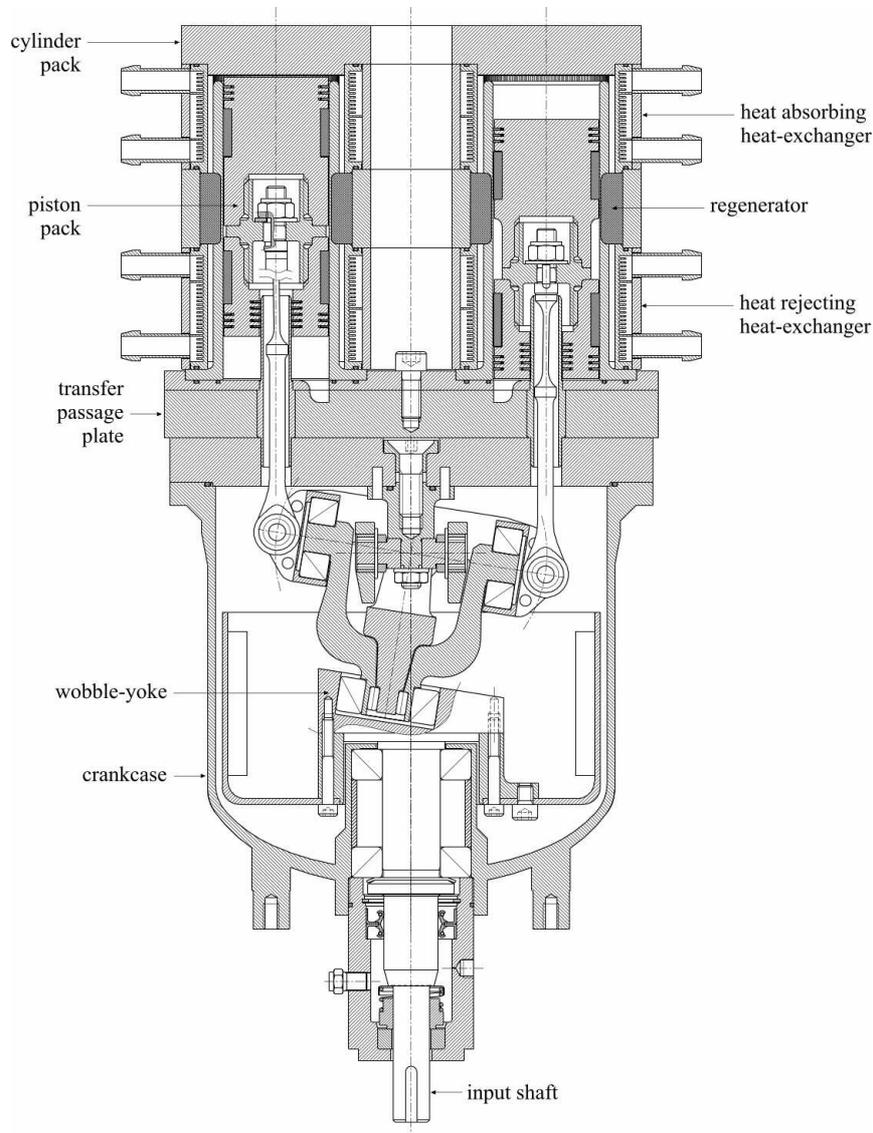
Cross-sectional general assembly drawing of DH1 heat-pump/refrigerator experimental rig in a 4- α double-acting configuration (some components removed for clarity).
